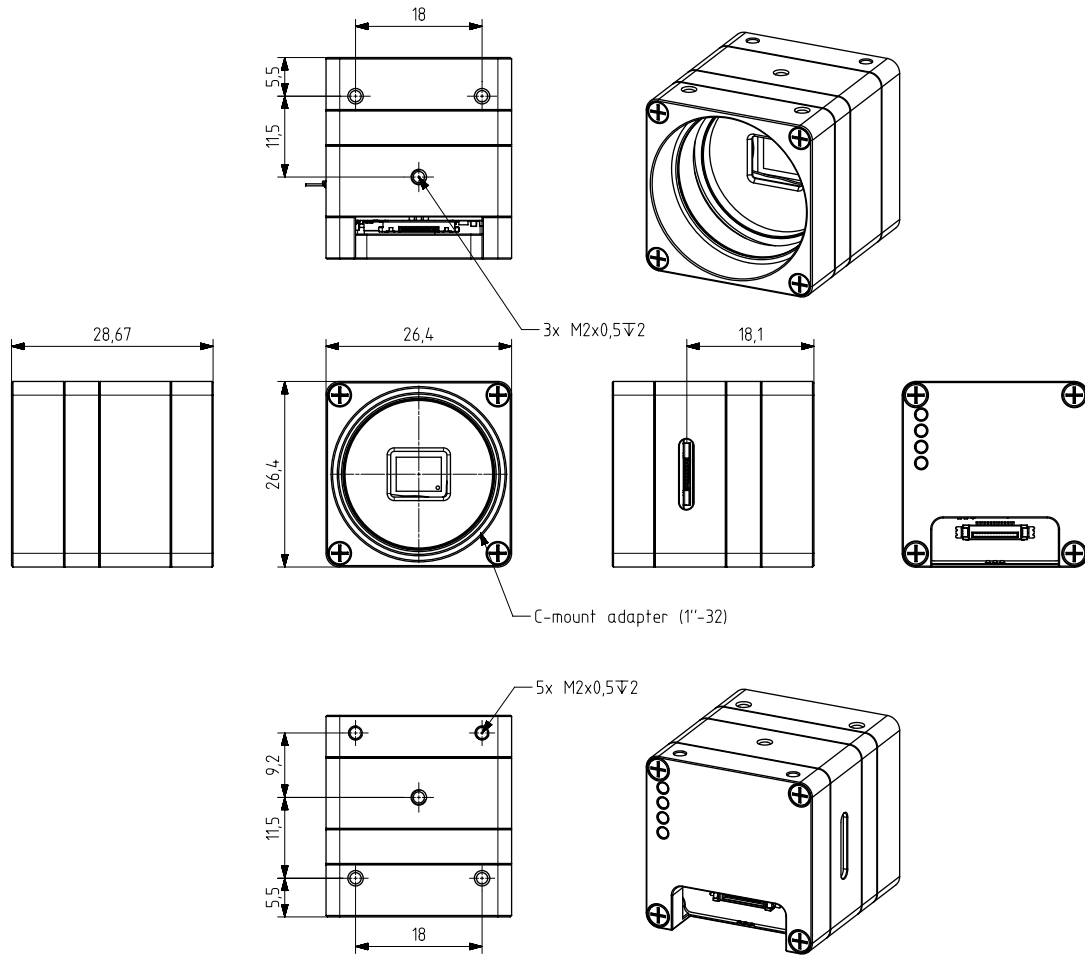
Dimensional drawing of MU003TG-SY-UC with C-mount
